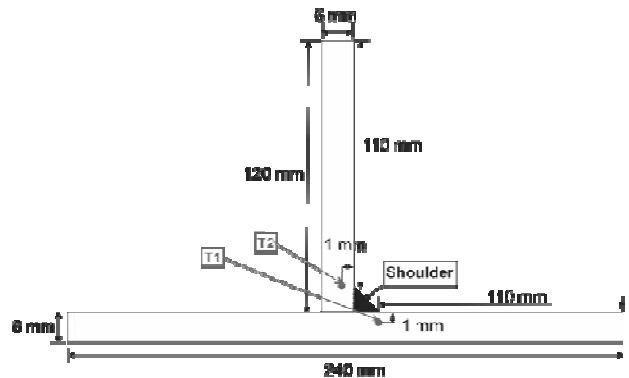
Dimensions of the welded joints and position of the two thermocouples.
